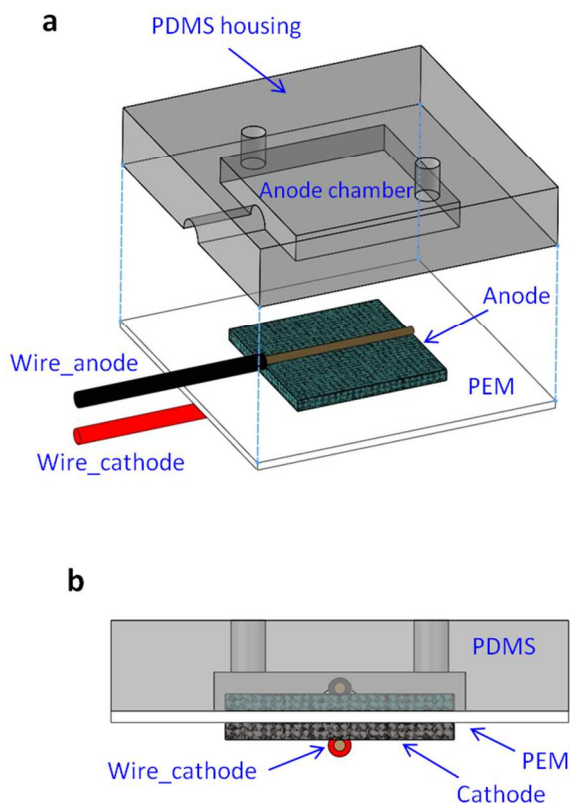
Schematic of prototype cell design: (a) exploded view; (b) side view.
